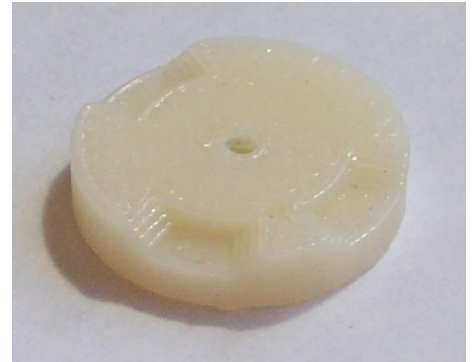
Four Braille disks were manufactured using the 3D printer.
